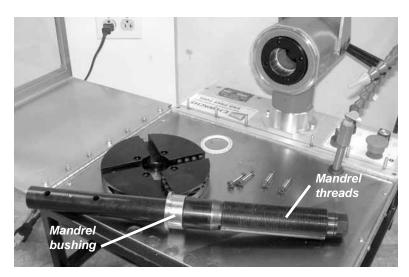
Inspect the mandrel bushing and the mandrel threads. Replace the mandrel if damaged.
